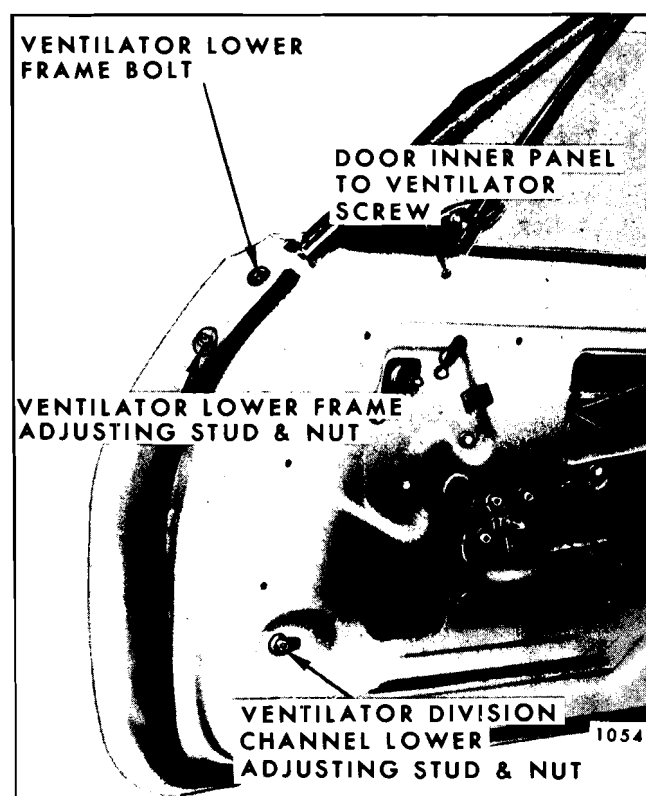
Front Door Ventilator Attachments - "Z" Styles
